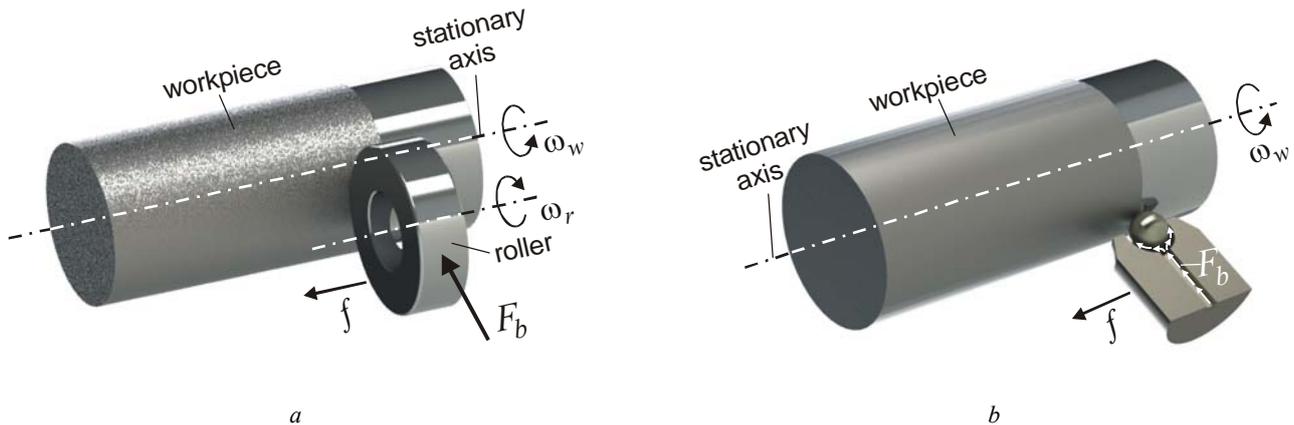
Scheme of: a) single roller burnishing; b) ball burnishing with a hydrostatic sphere
